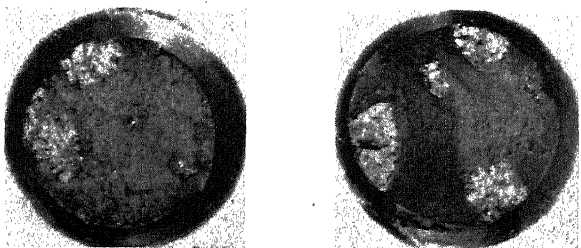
FRACTURES TEST-BAR 948D. SAME FORGING AS FIG. 23 AFTER ADDITIONAL
